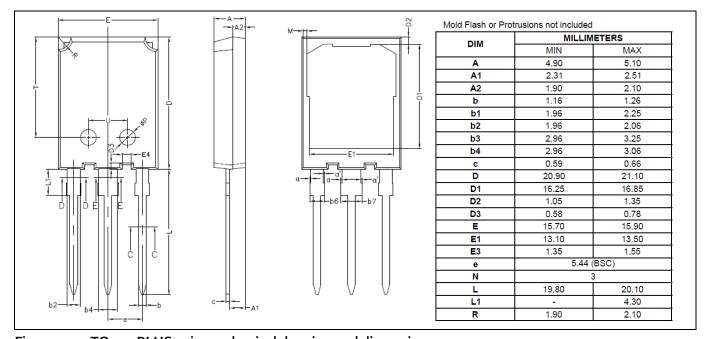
TO-247PLUS 3pin mechanical drawing and dimensions
